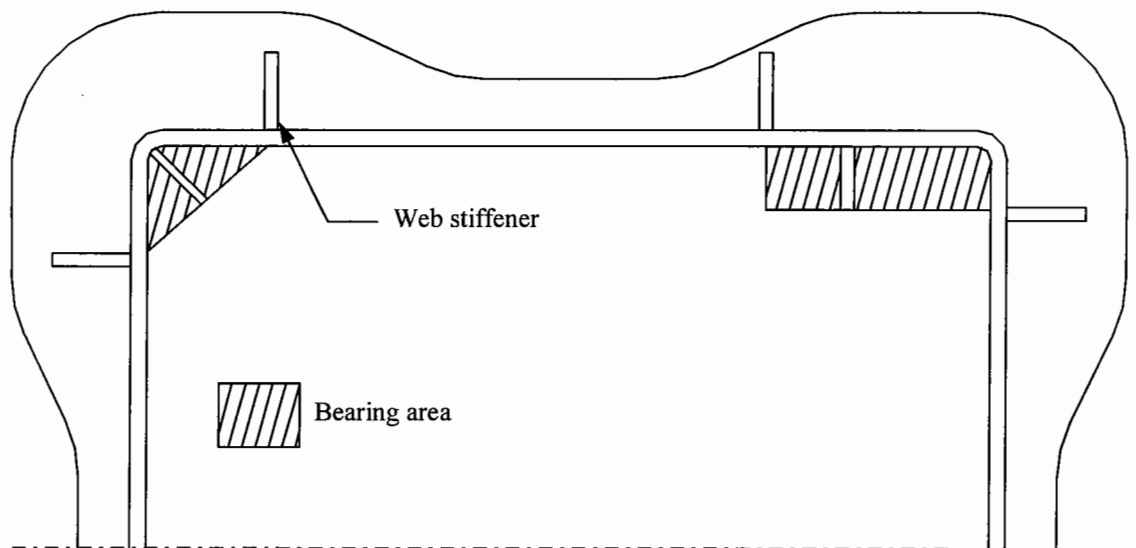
Plan view of the revised Chieftain 600 x 600 x 100mm deep frame design
